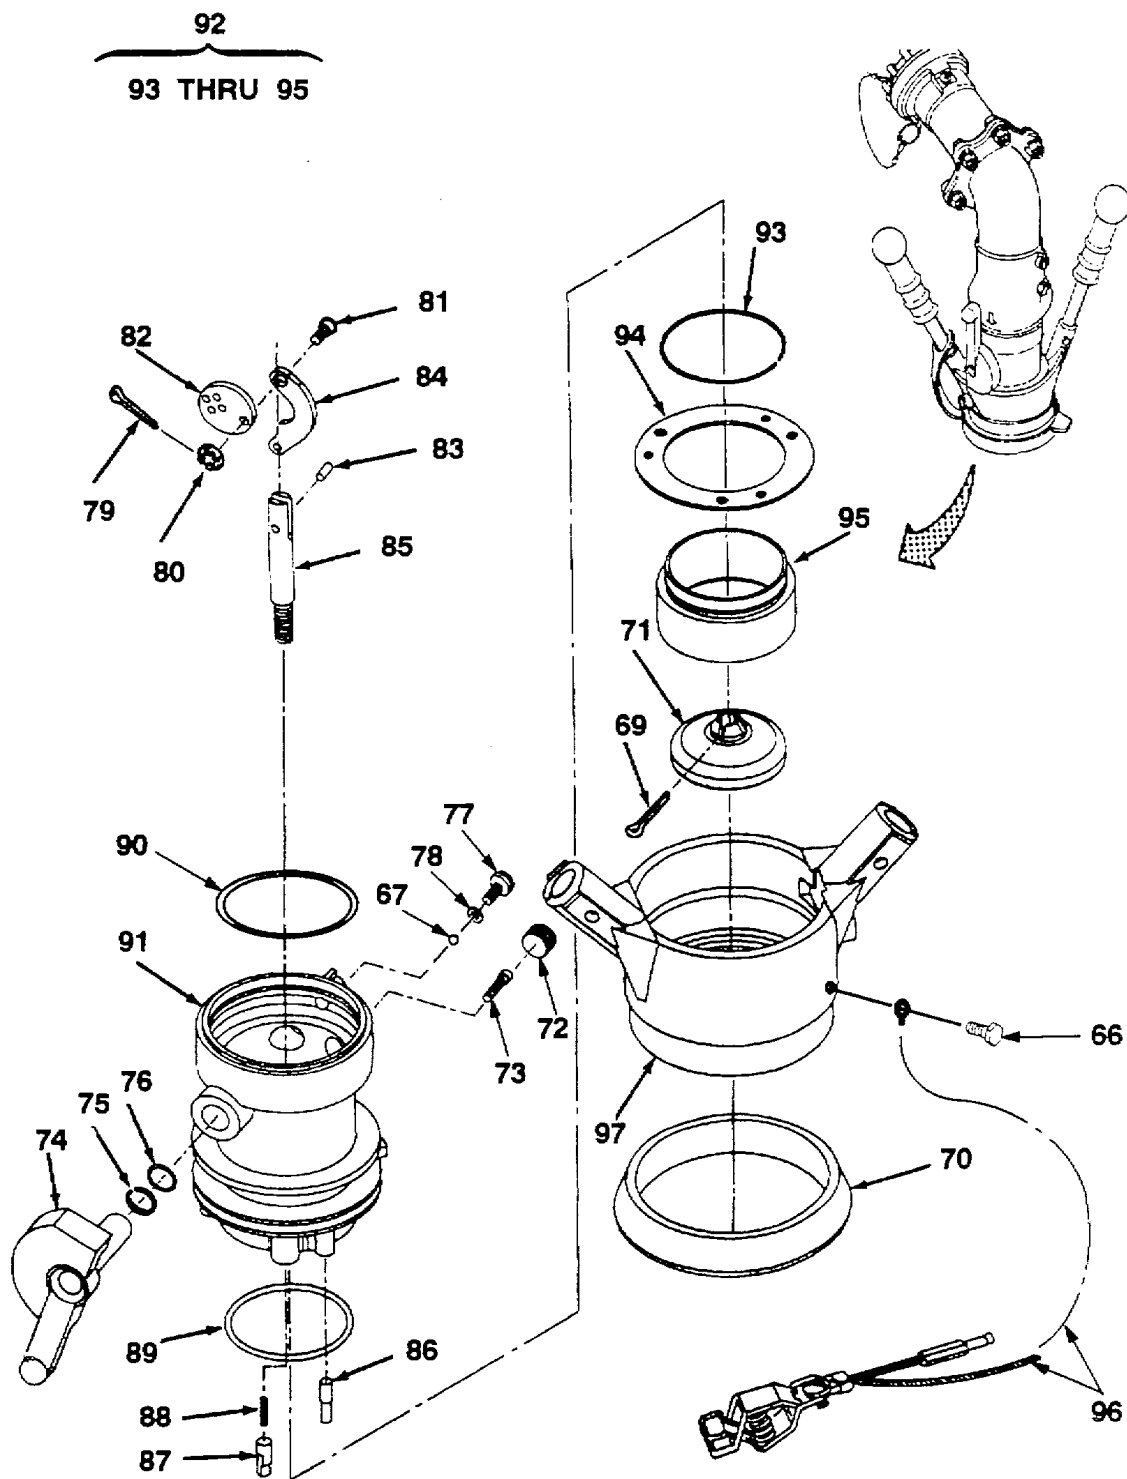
A. Pressure Fueling Nozzle Assembly (HTARS101) (Sheet 6 of 6)
